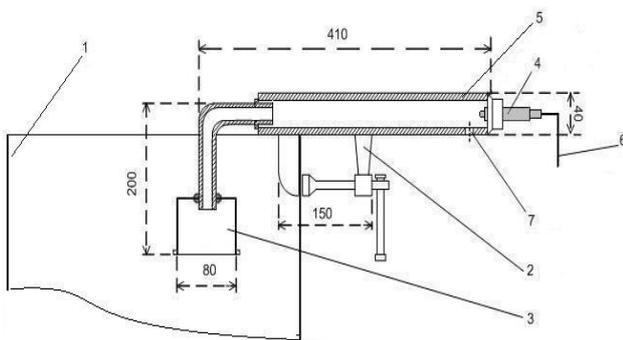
Device installation for control of coefficient of excess of air on an exhaust pipe of a locomotive: 1 – exhaust pipe; 2 – clamp; 3 – gas intake; 4 – sensor; 5 - collector; 6 – connecting cable; 7 - opening.
